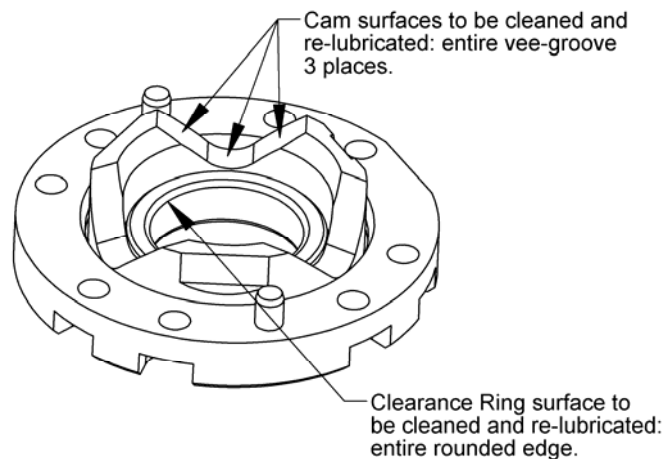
Cleaning and Re-lubricating the Cover Plate Assembly
